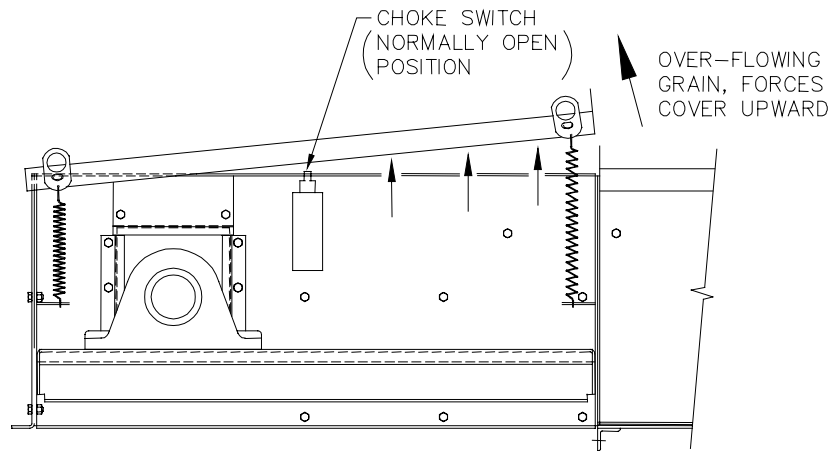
B, Discharge Choke/Chain Break Switch Mechanism in Material Choke Condition
